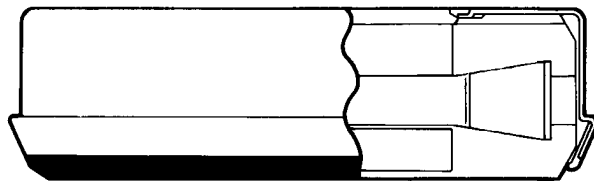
One-Piece Sealed Thrust Bearing Installed With The Seal Lip Towards The Bottom Of The Knuckle
